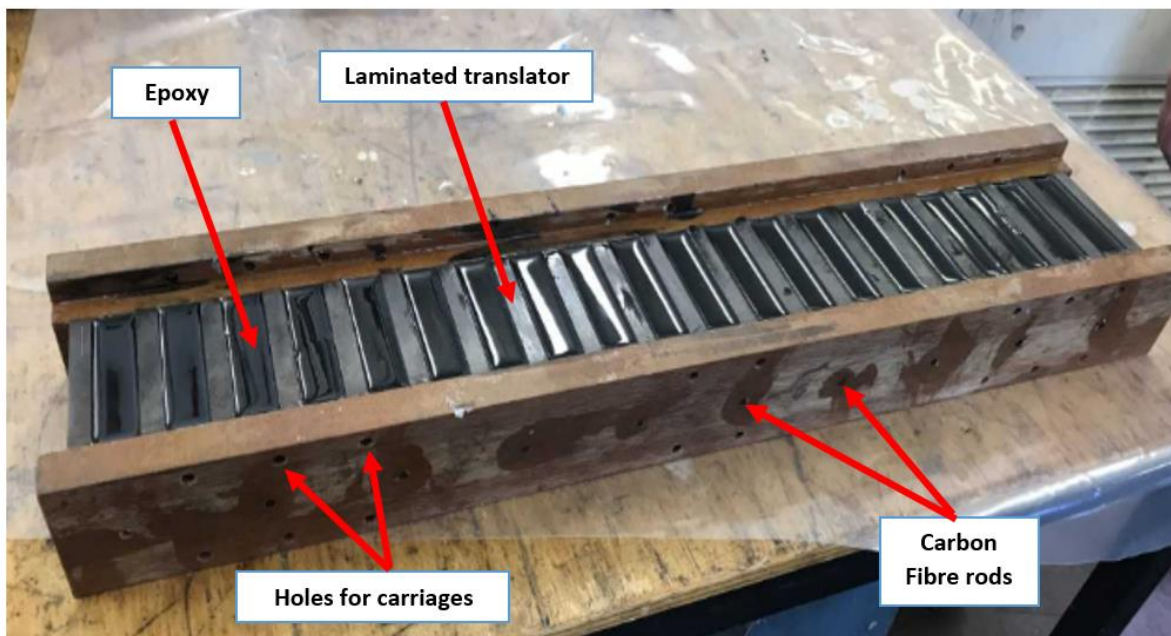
12: Laminated translator and Tufnol bars after the assembly
